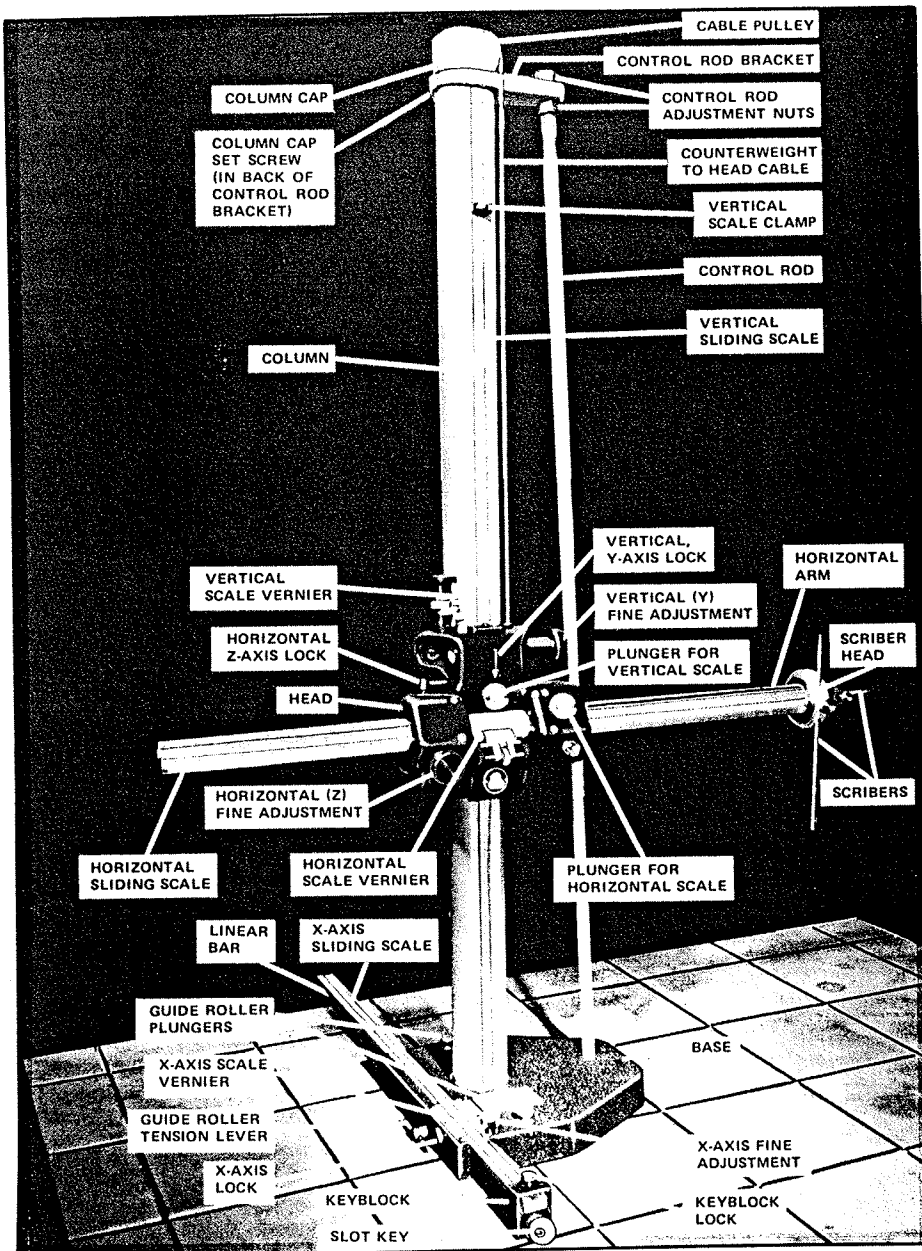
Bendix LO series layout machine (Courtesy of Bendix Corp.)
